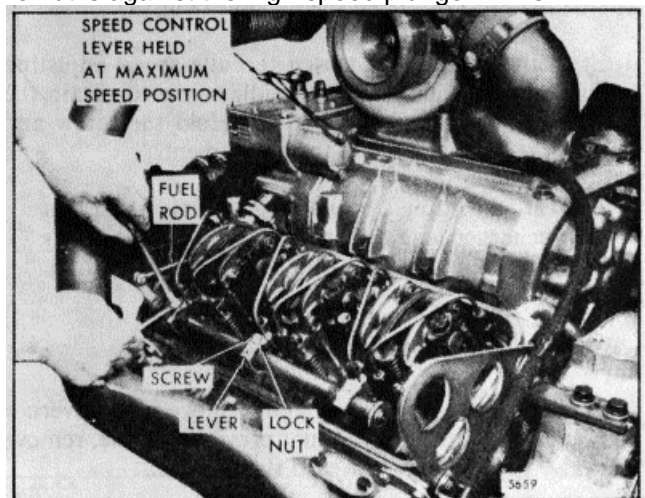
Position No. 1 Injector Rack Control Lever (One Screw and Locknut Assembly)
